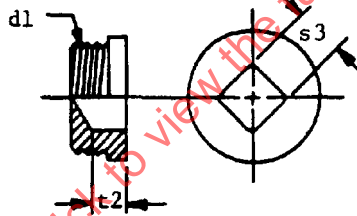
TYPE C SQUARE SOCKET HEAD PLUGS
